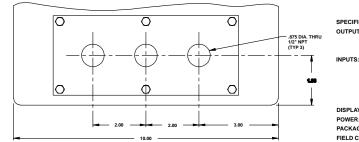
LOGIC MODULE MOUNTING DIMENSIONS
